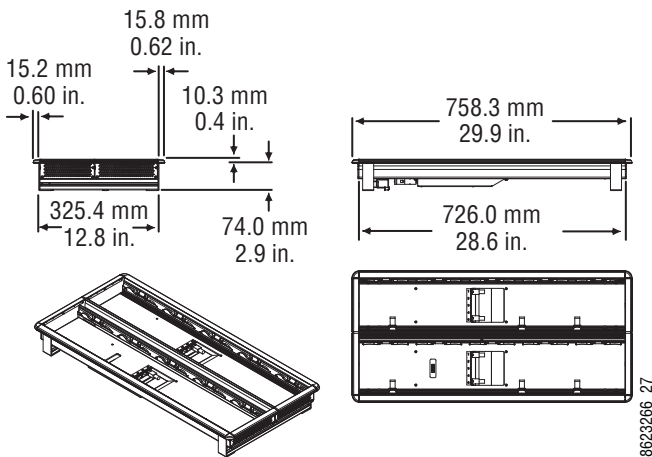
1-ME 15 Control Panel Cutout Dimensions, Flat Installation
